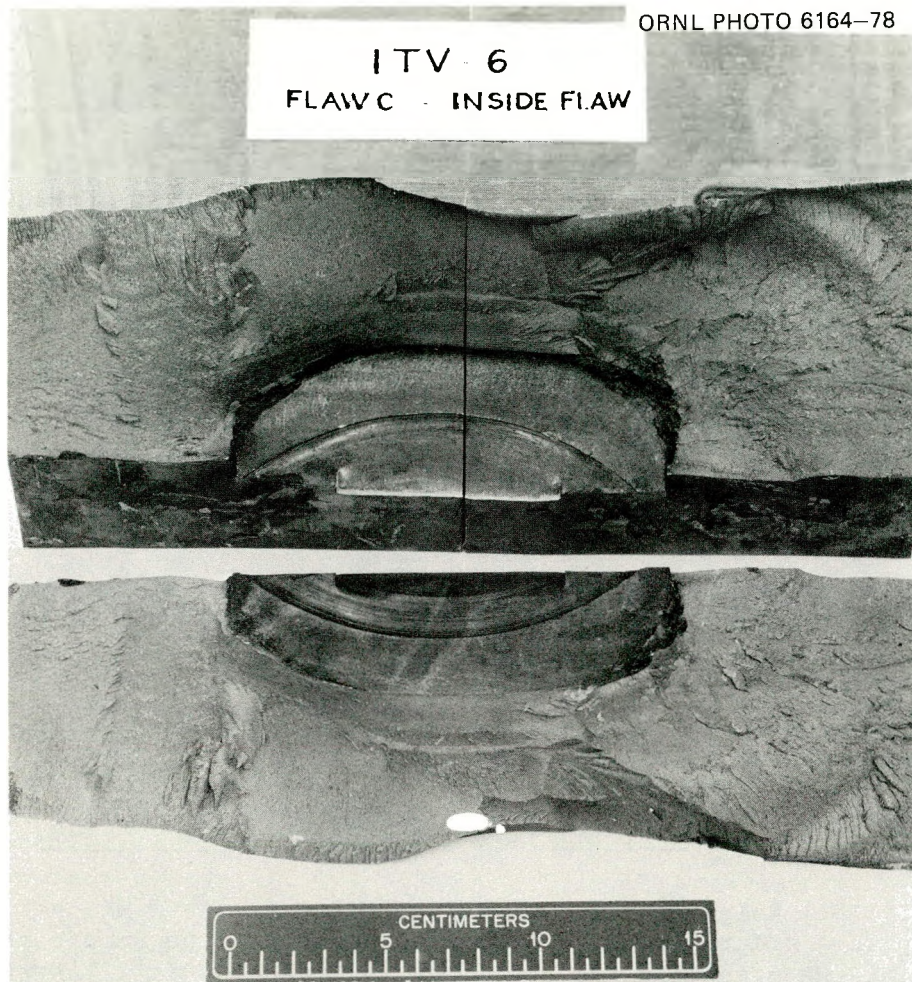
Fracture surfaces of flaw C from intermediate test vessel V-6.
